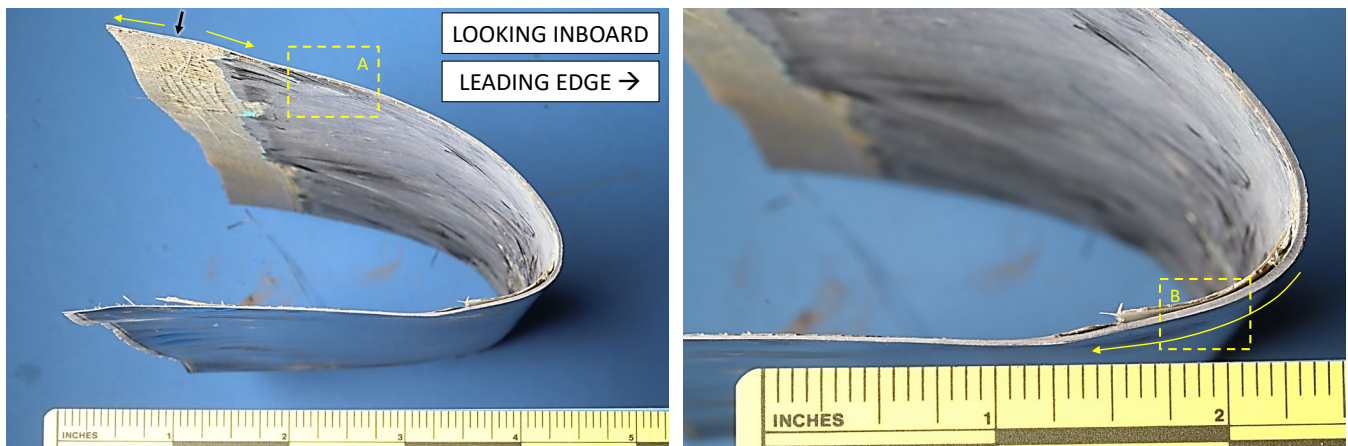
Photograph of the inboard red blade leading-edge cap flat fracture surface (left) with the origin area indicated by a black arrow. A closer view of the lower surface near the highlight is shown on the right. Crack propagation direction is indicated by yellow arrows. Closer views of the origin area and the areas boxed in yellow are shown in subsequent figures.
